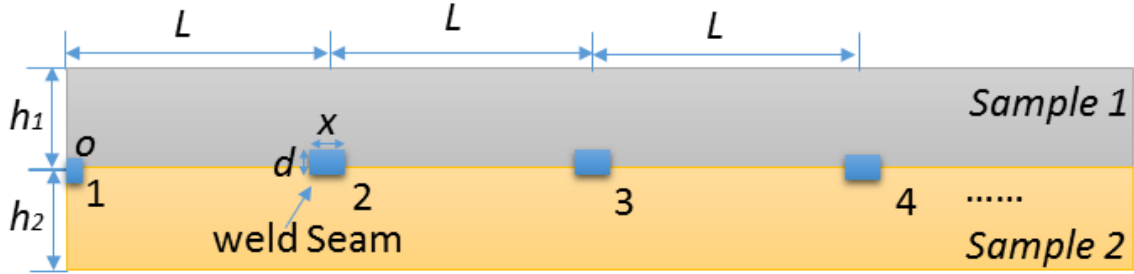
One dimension model for spiral pattern welding.
